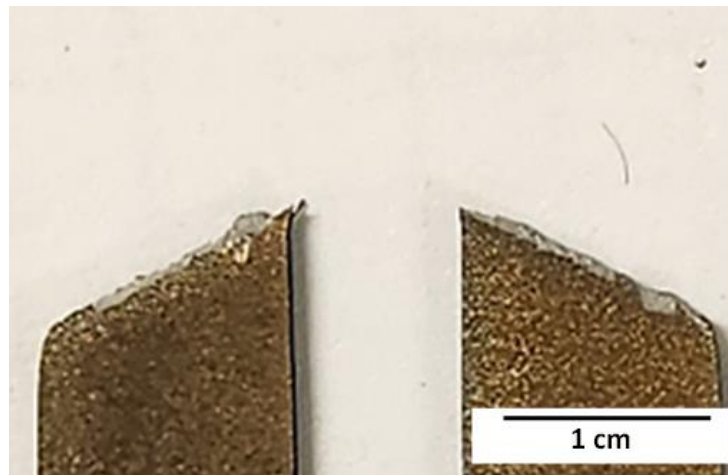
Quasistatic tensile test 100°C fracture sample Q100-B
